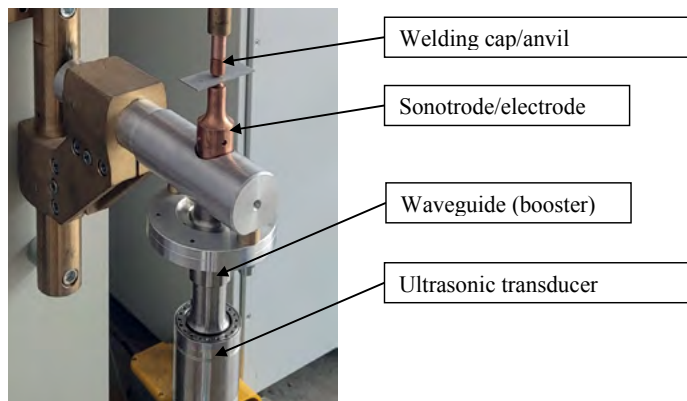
Test rig – ultrasonic system-aided welding window
